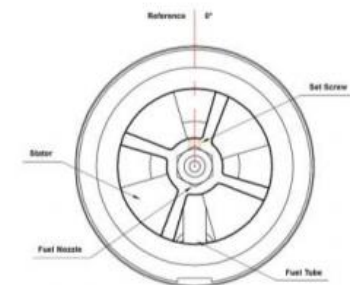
S-29 Stator Axial Position (looking into draft tube)
